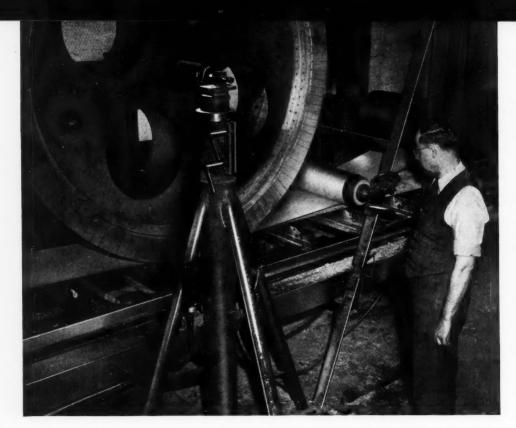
(Left) Special Endless-belt Sanding Machine Used to Finish Rotor Blades to Required Profile
